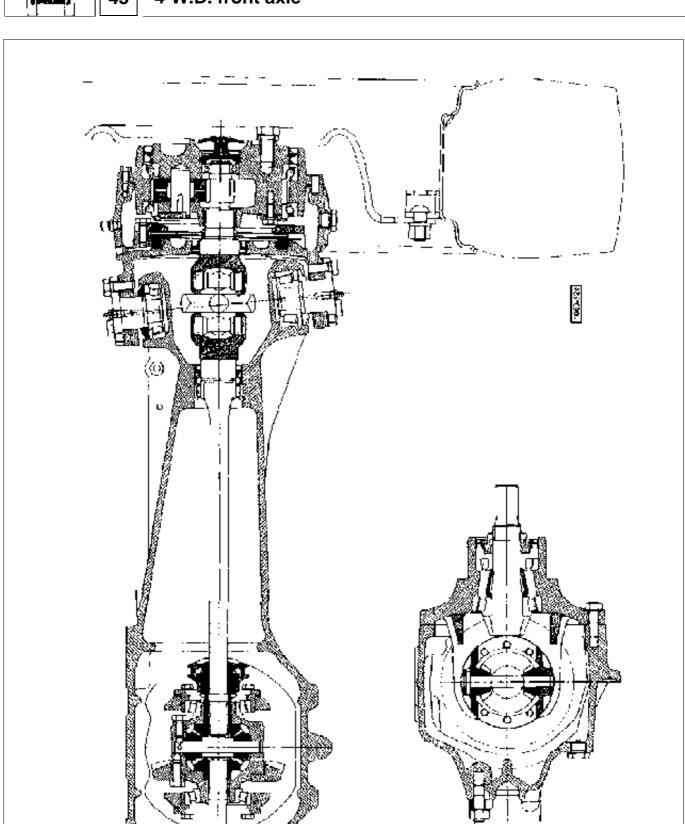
Longitudinal section through front drive axle (basic version); details of the version with steering angle sensor for SBA system are given in the next chapter.
